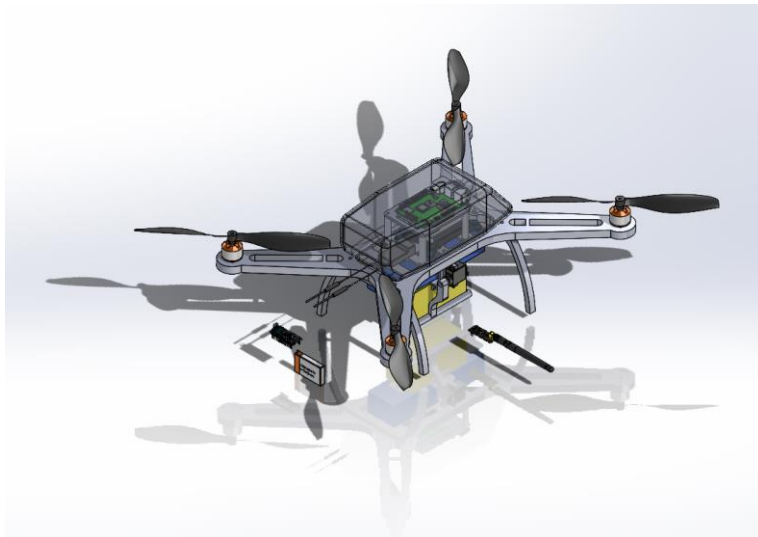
CAD model of modular quadcopter frame. X-configuration with 450mm motor-to-motor spacing. Modular design enables individual component replacement.
